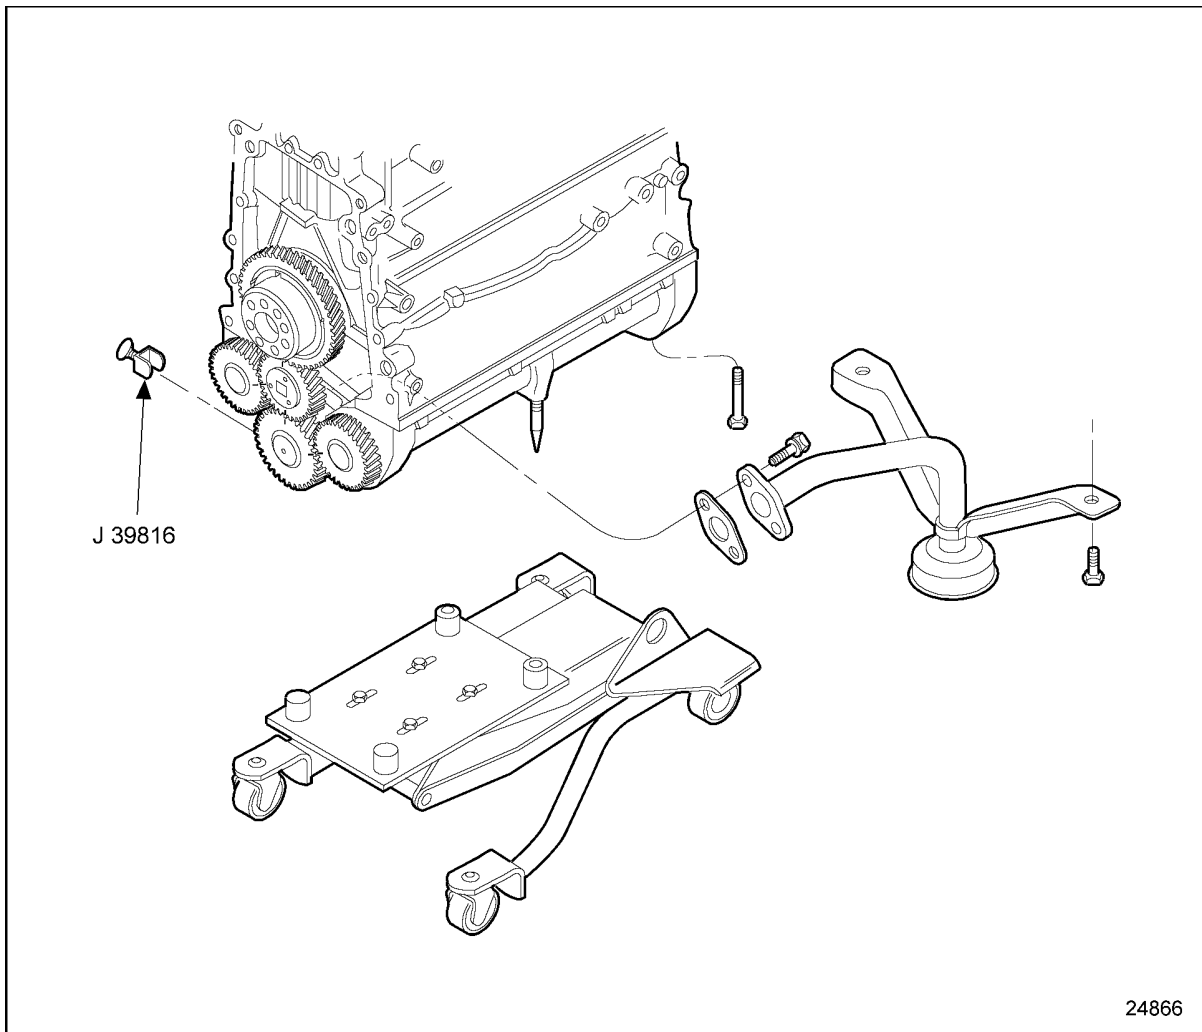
Balance Shaft and Oil Pump Mechanism Showing Tool J 39816
